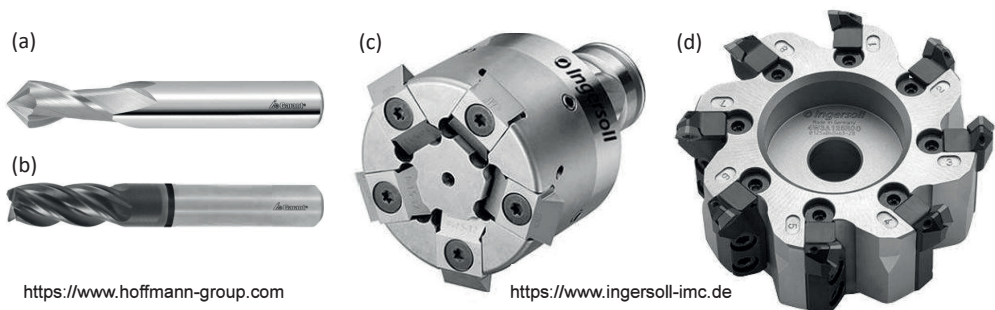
Different milling tools used for profile milling: (a) chamfer milling cutter; (b) solid end mill; (c) circular mill; (d) face milling cutter.
